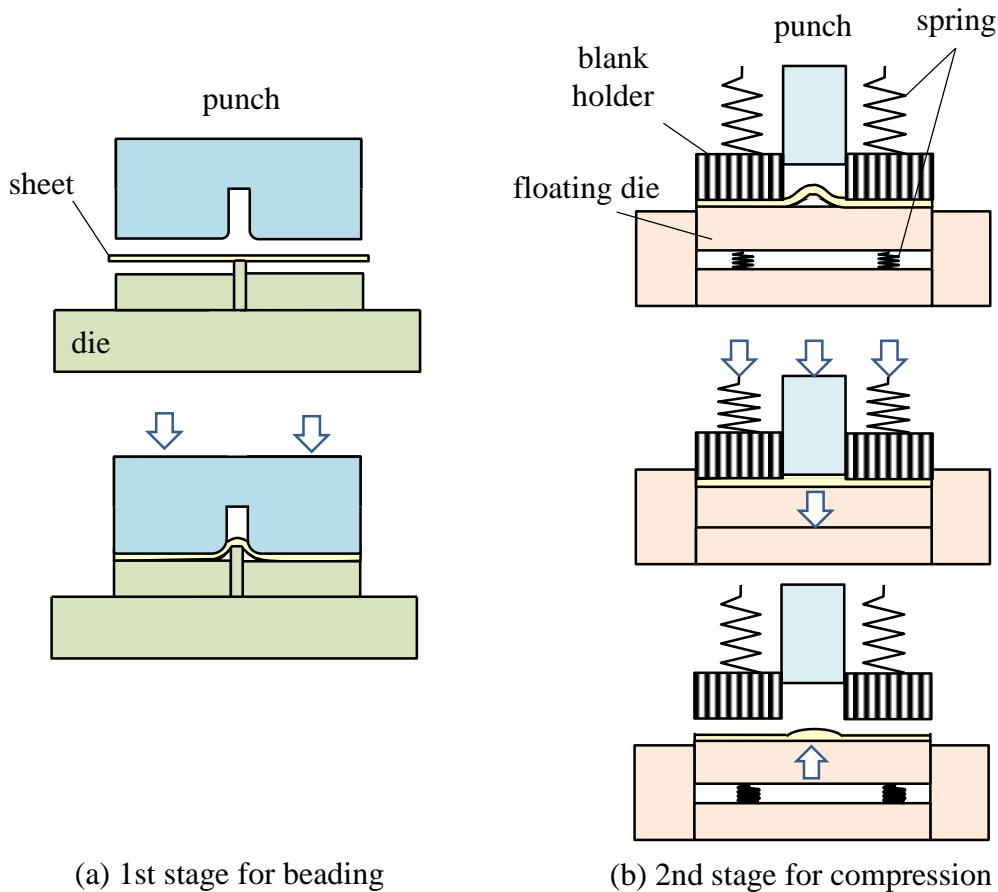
Experimental setup for sheet having local thickening by beading and compression.
